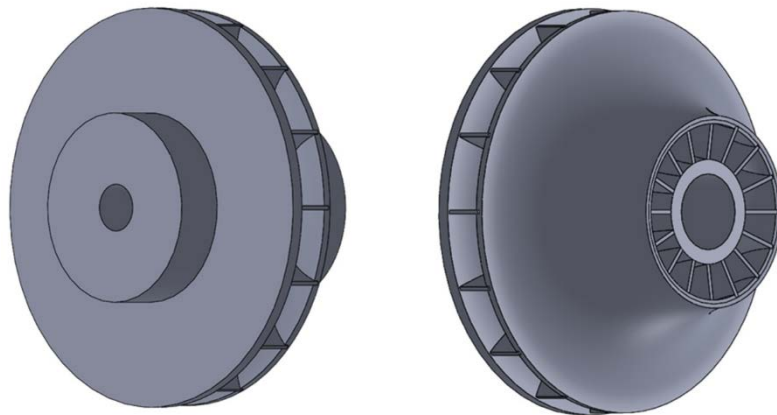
View of Back Side (left) and Front Side (right) of Notional Impeller Design.
